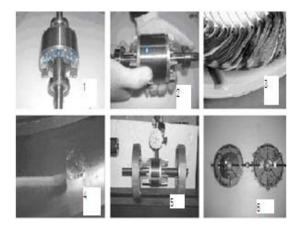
Faults in the induction machines: 1rotor unbalance, 2-broken rotor bars, 3-stator fault 4-faulty bearing, 5-bowed rotor; 6eccentricity.
